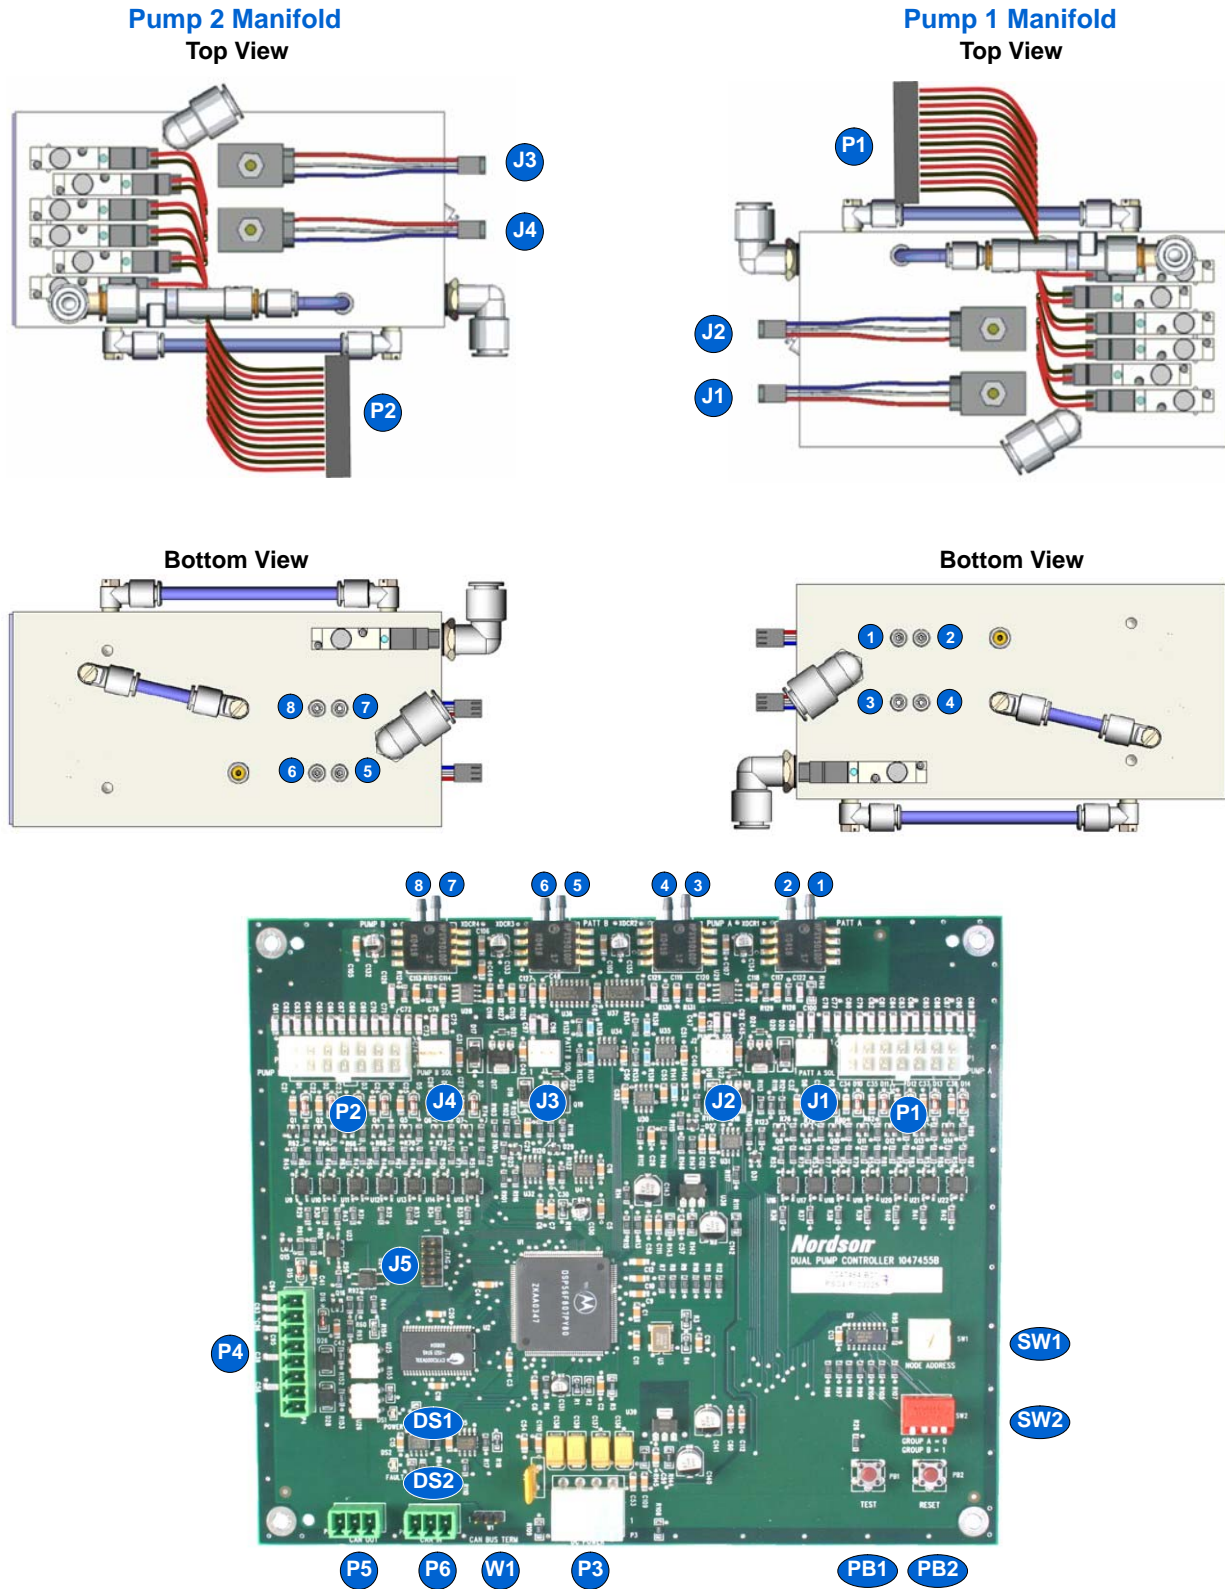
Circuit Board-to-Pump Control Manifold Connections
